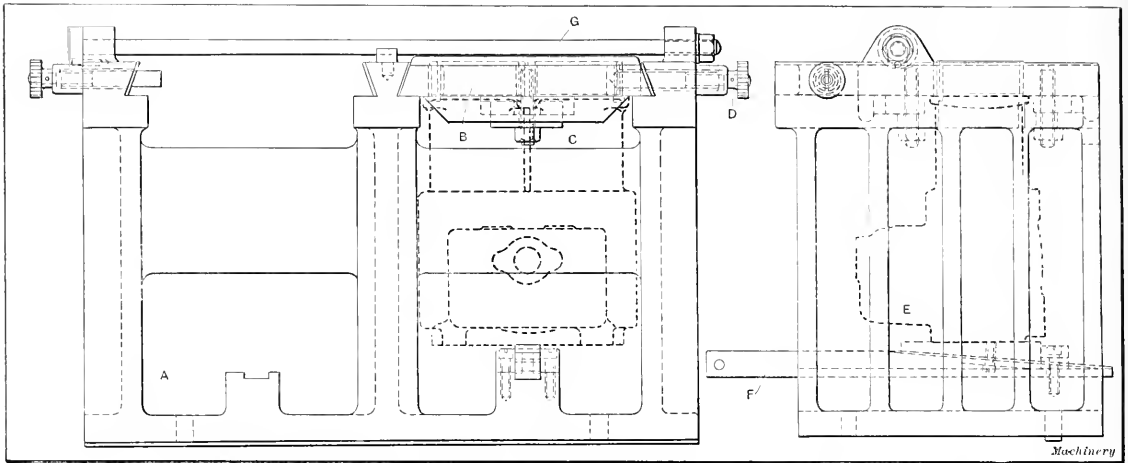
The Rough-boring Jig which carries Two Cylinder Castings and is used in the Machine shown in Fig. 8
